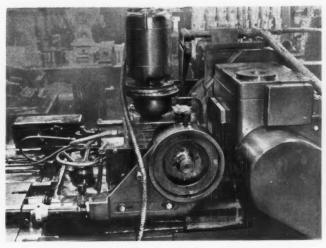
The cam controlling the motion of the piston on the Scrivener machine
